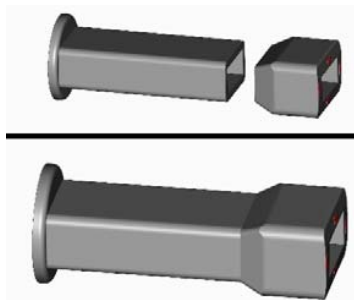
Installation of Sensors' Package on the intermediate part, perspective view
